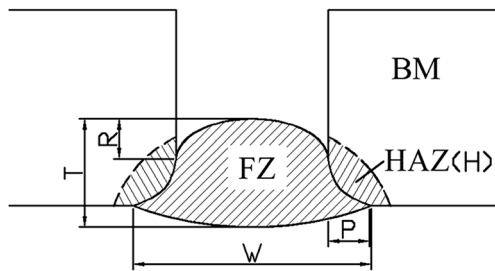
Schematic diagram of the weld bead cross-section
